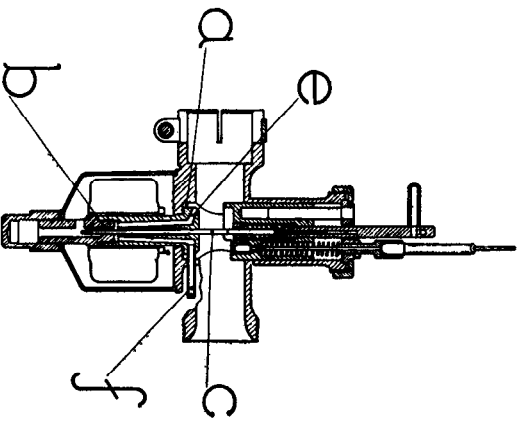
SECTIONAL ARRANGEMENT OF SINGLE-LEVER CARBURETTER.
